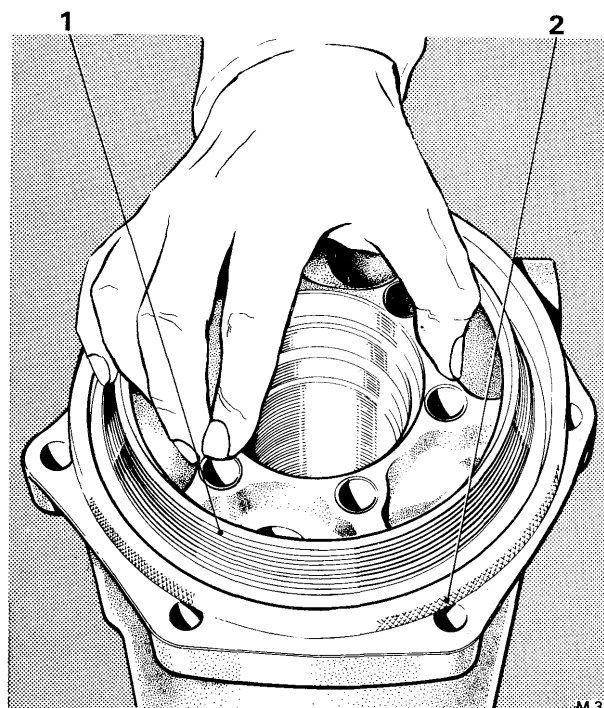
FITTING THE REVERSE CLUTCH PISTON
